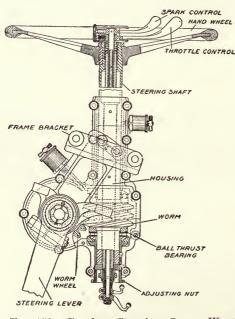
Peerless Steering Gear. Worm and Wheel Type.
